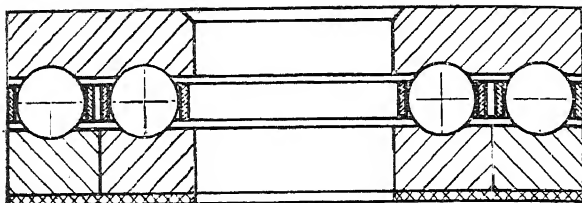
Special double-row thrust bearing on linoleum washer.
